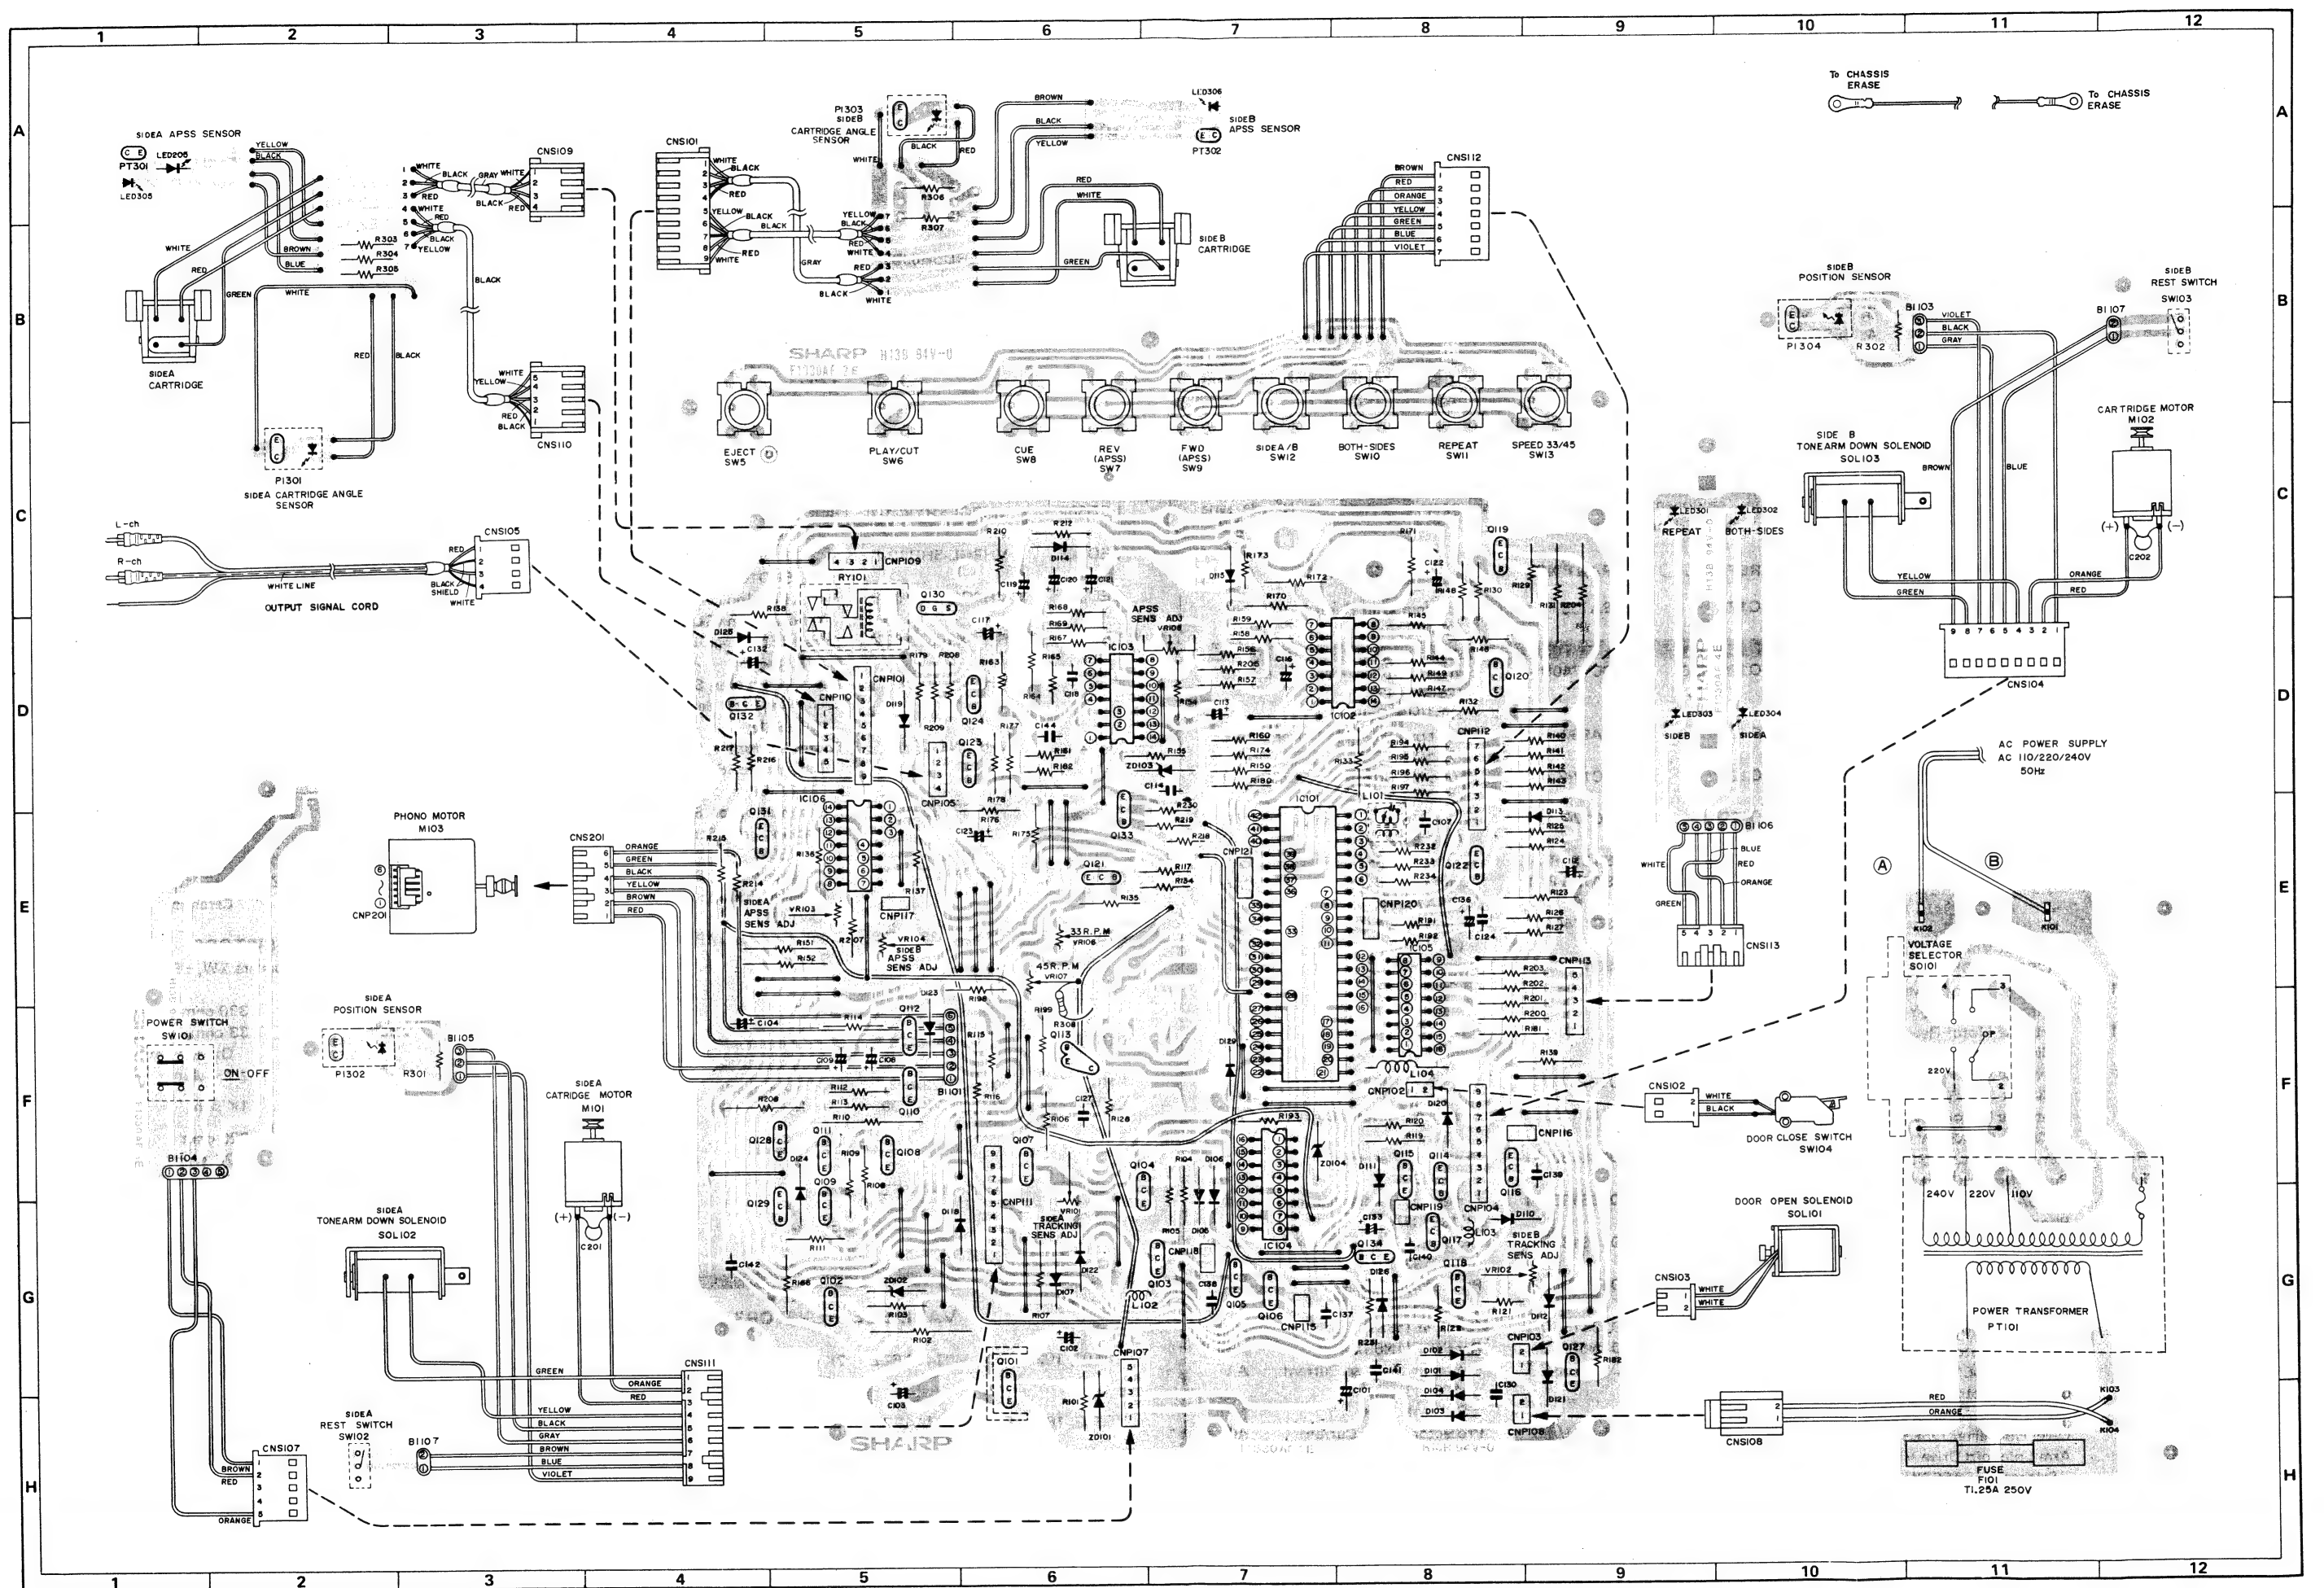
WIRING SIDE OF P.W. BOARD (RP-114H)
